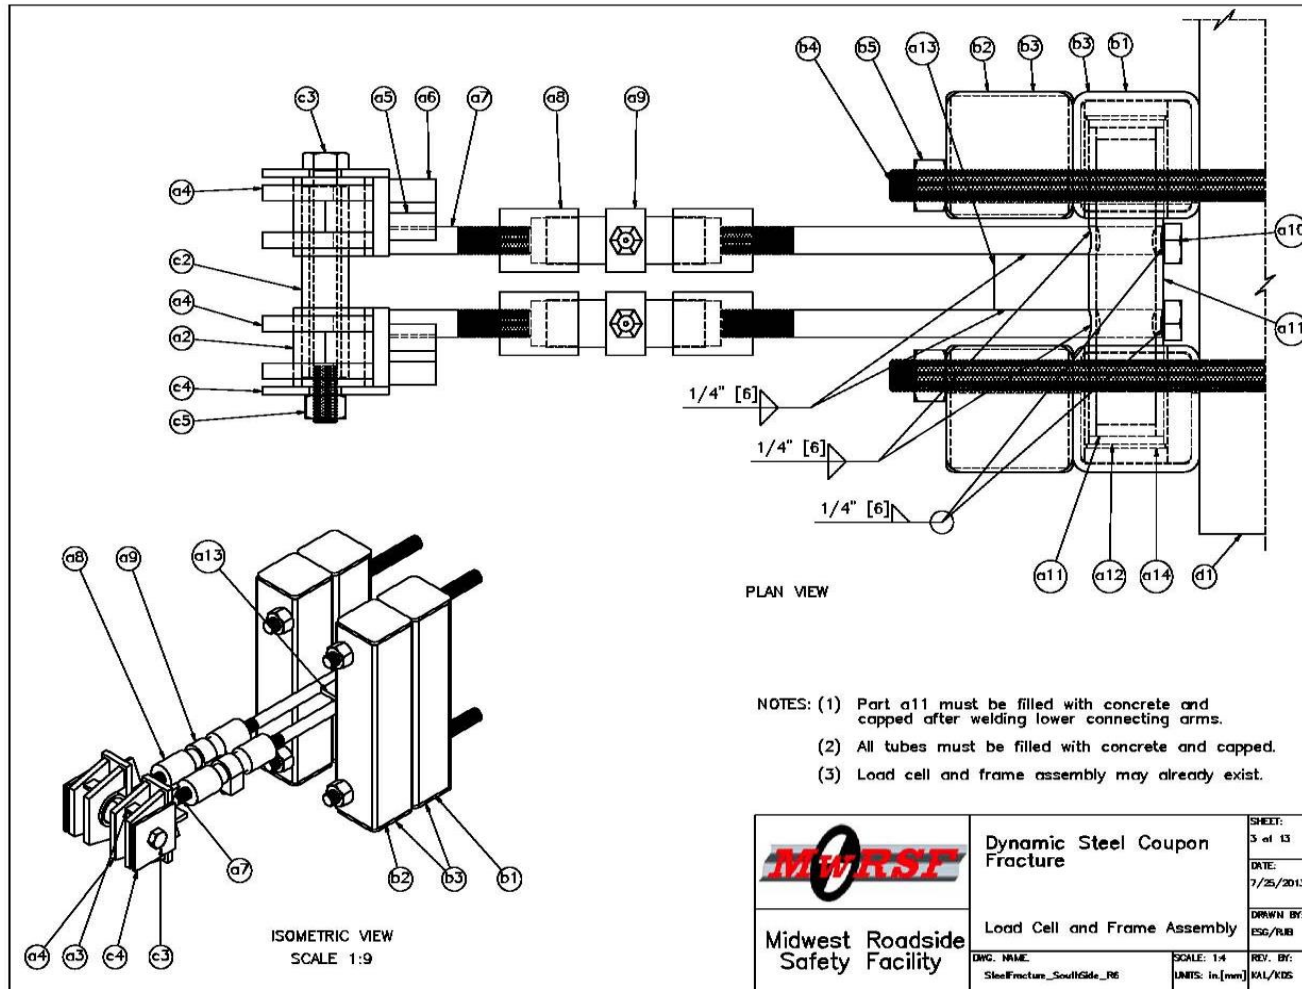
Load Cell Assembly and Coupon Mounting Frame
